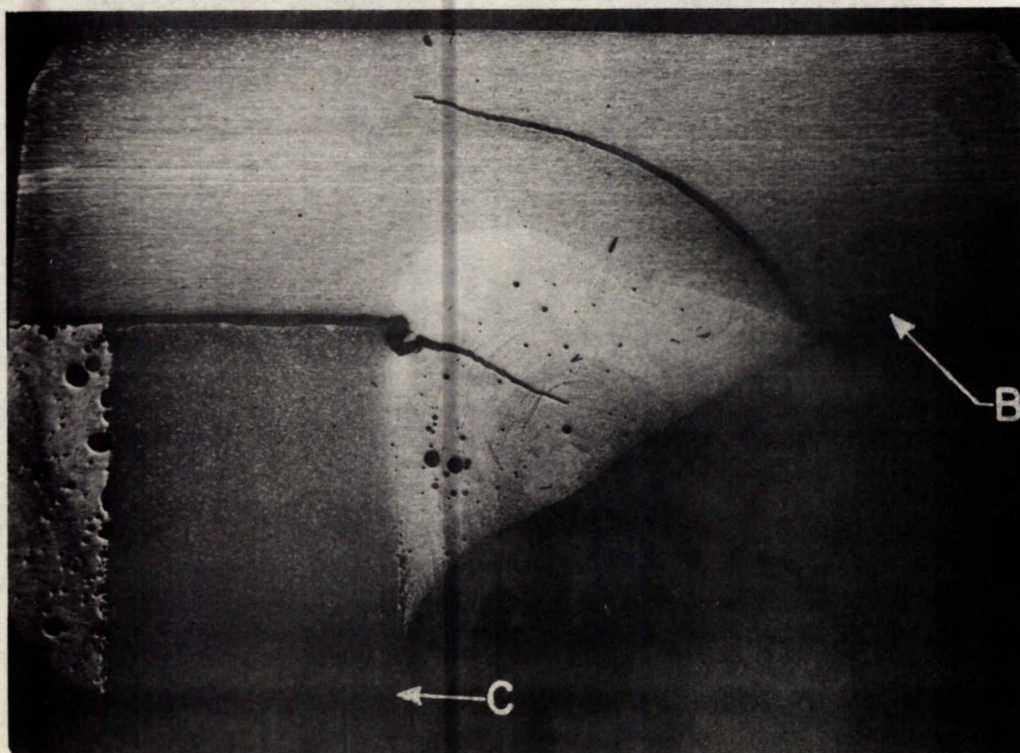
Macro photograph of cross section of weld shown in Figure 6. (Keller's etch; X6).
